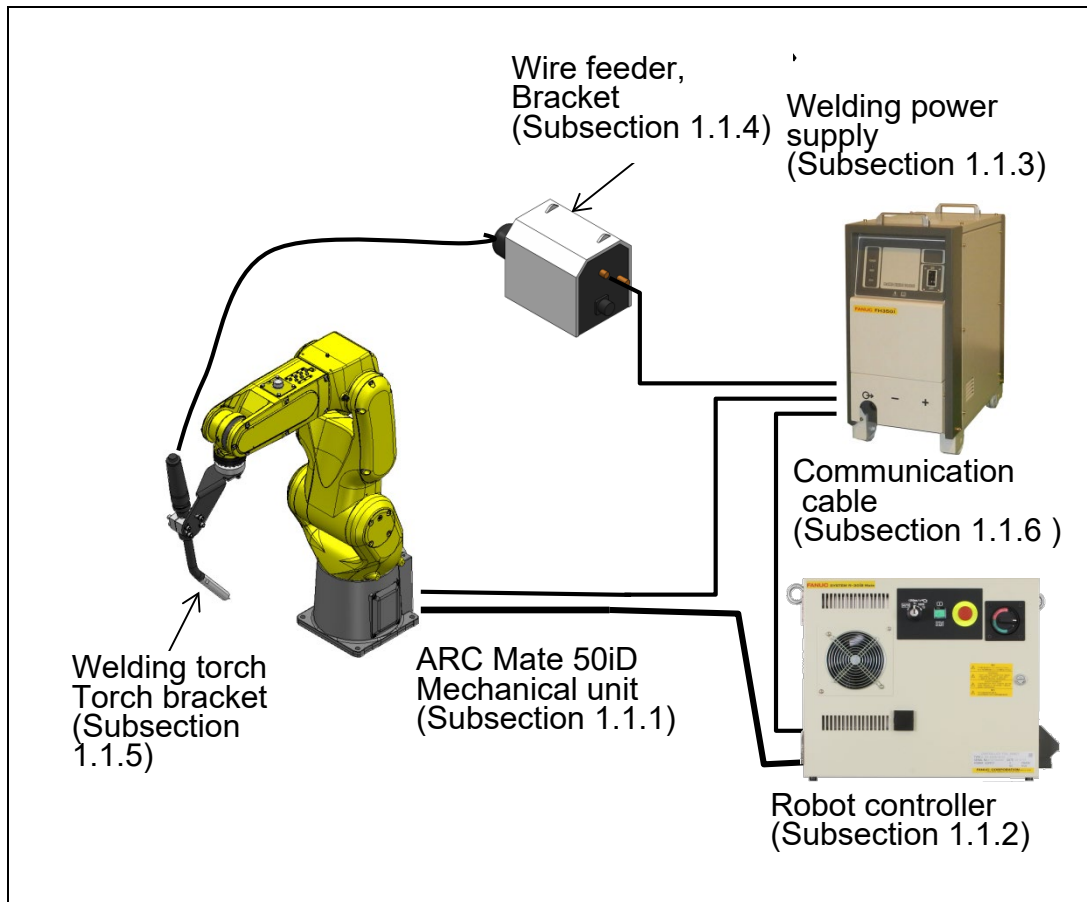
(b) Configuration of robot with welding power supply option
